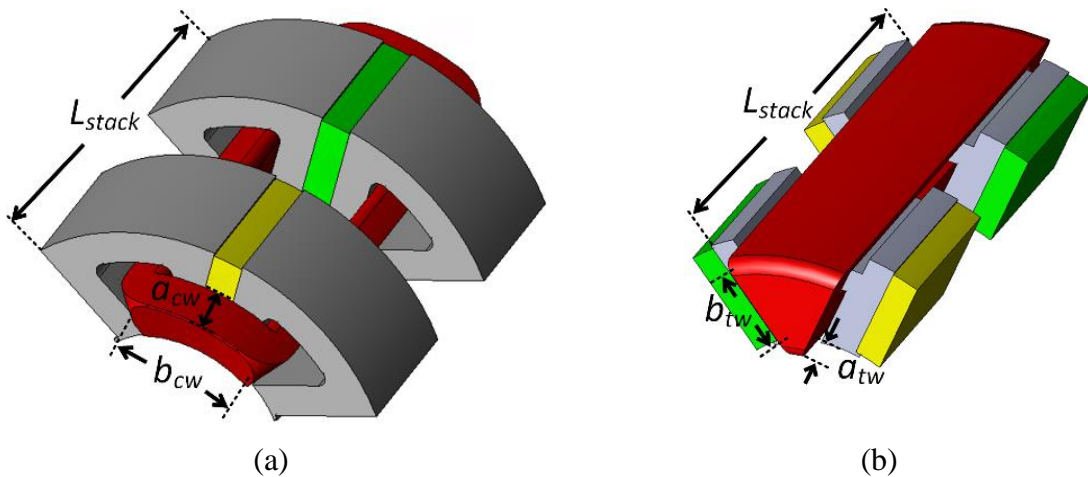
Stator units with winding geometry parameters of (a) Double-layer concentrated winding and (b) Single-layer toroidal winding dual-stator 6/4 FSPM machine.
